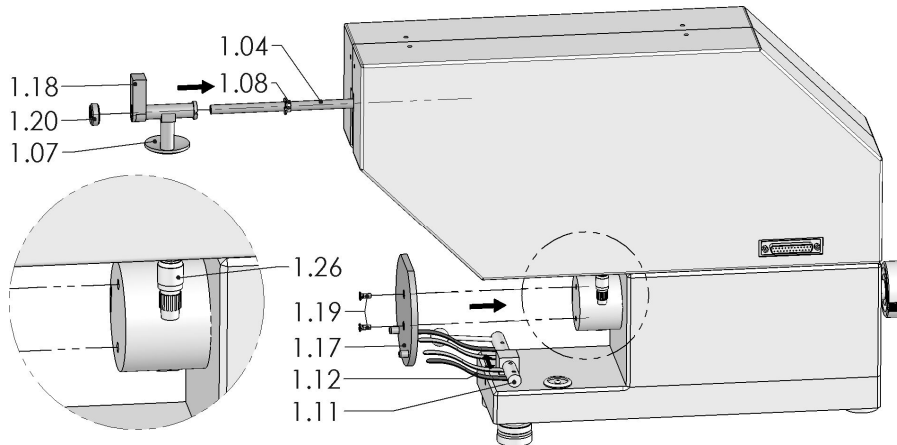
ASSEMBLY OF OPTIONAL PENDULUM HAMMER WITH ANVIL PLATE
